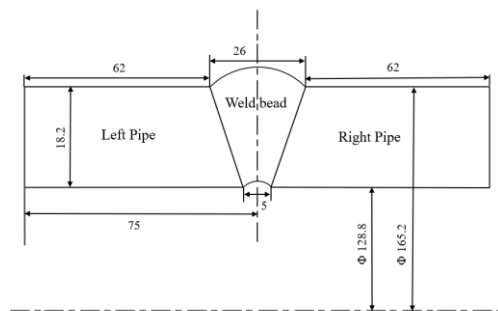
Weld groove dimensions in a pressurized pipeline system
